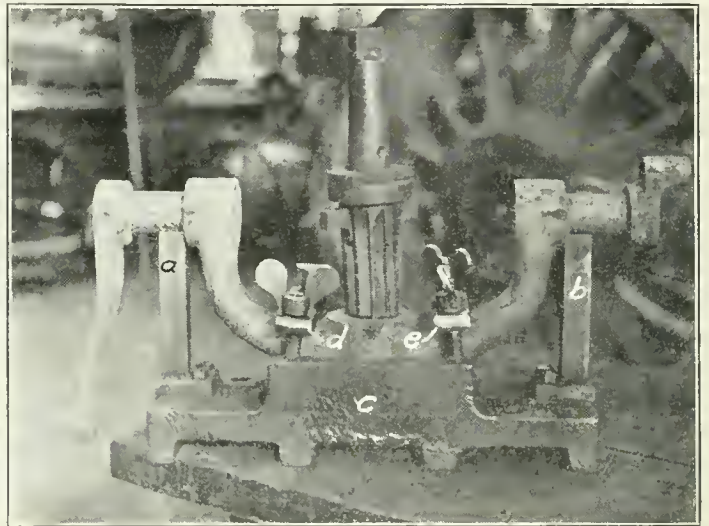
First Drilling Operation in Bell Hanger Boss.
